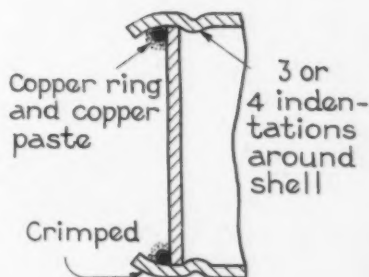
Snug joints in an assembly of stampings such as here shown are sometimes obtainable only by carefully peening the edges.
